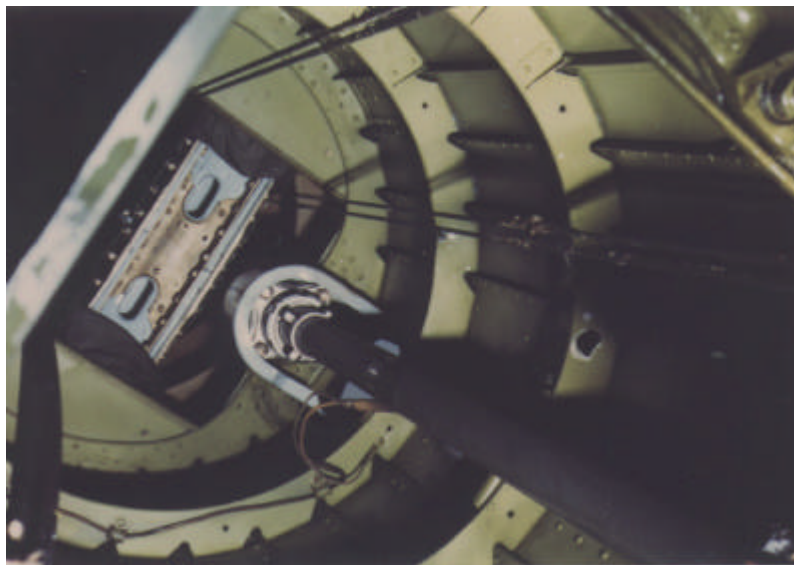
Ballistic damages of the tail rotor drive shaft and vicinity structure.
